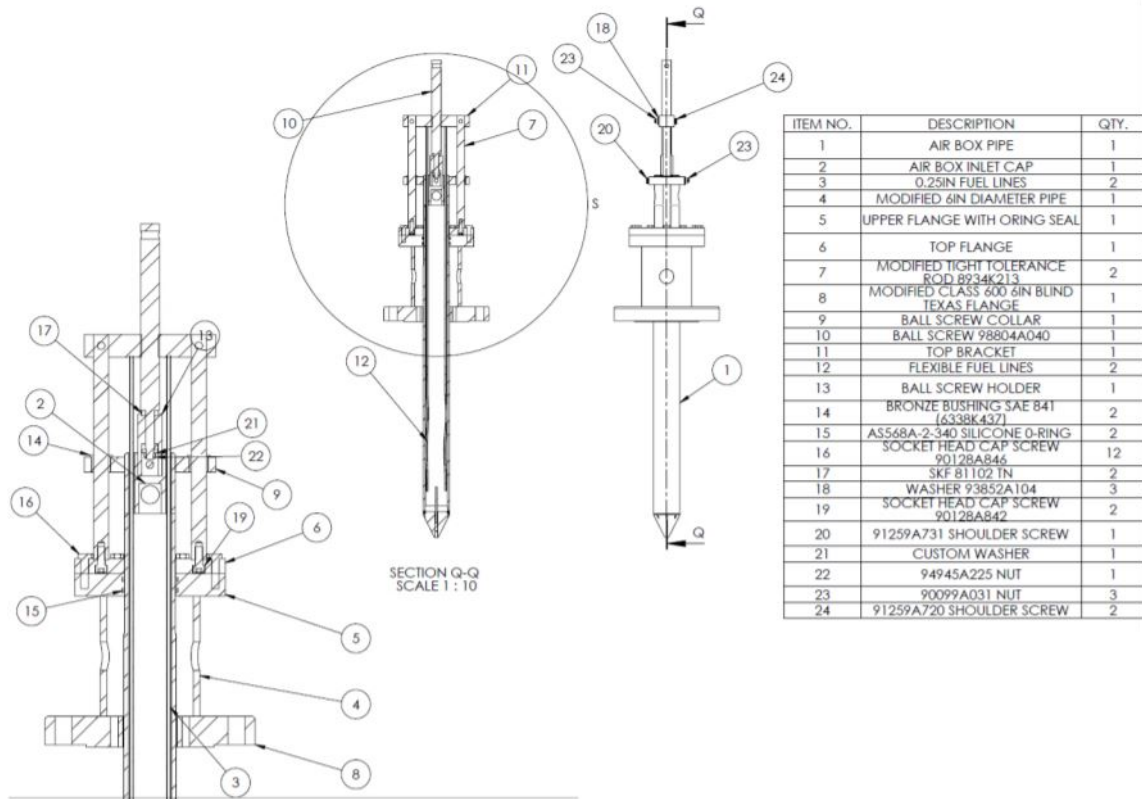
Airbox and assembly drawing with labels [14].
